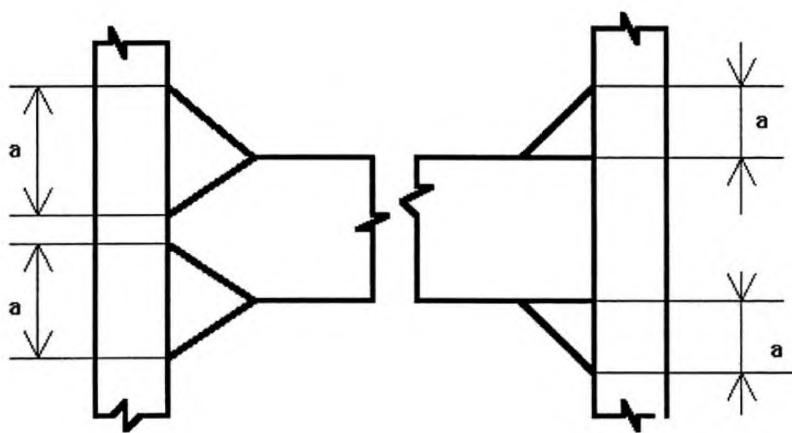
Definition of “a” for types of weld 10 and 11
